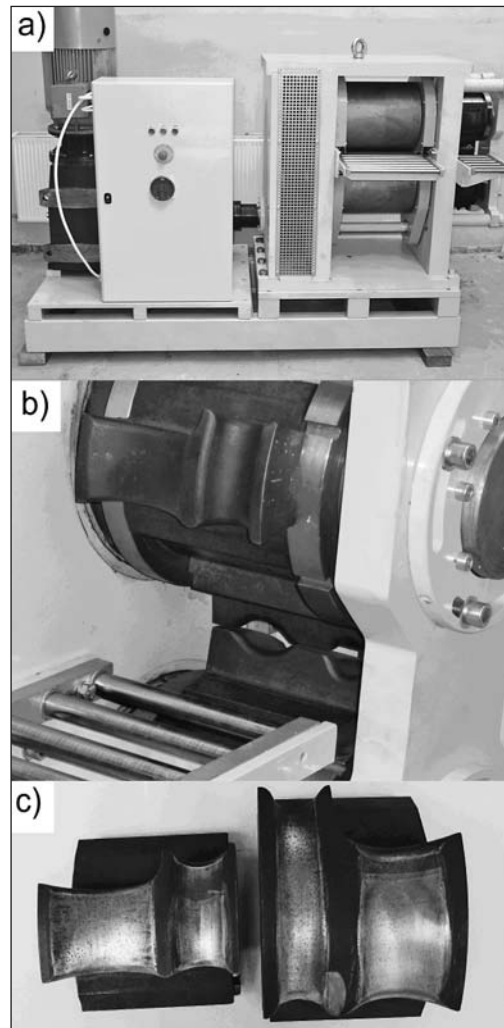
Roll forging mill - a),workspace –b), segments for rolling a preform –c)
